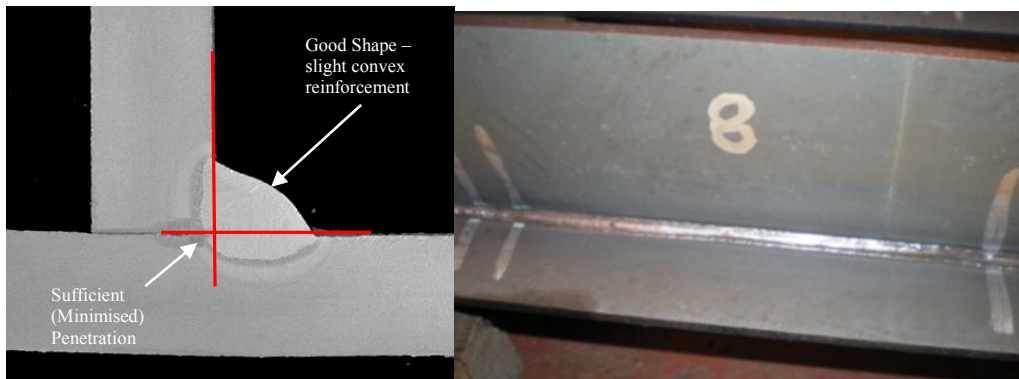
Macro image and photograph of acceptable fillet weld profile
